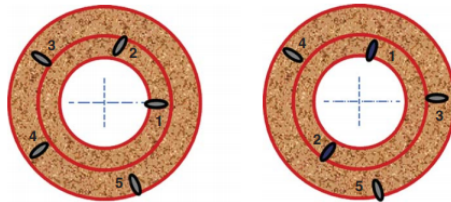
Traditional cutter layout to the left and new layout to the right [67].
